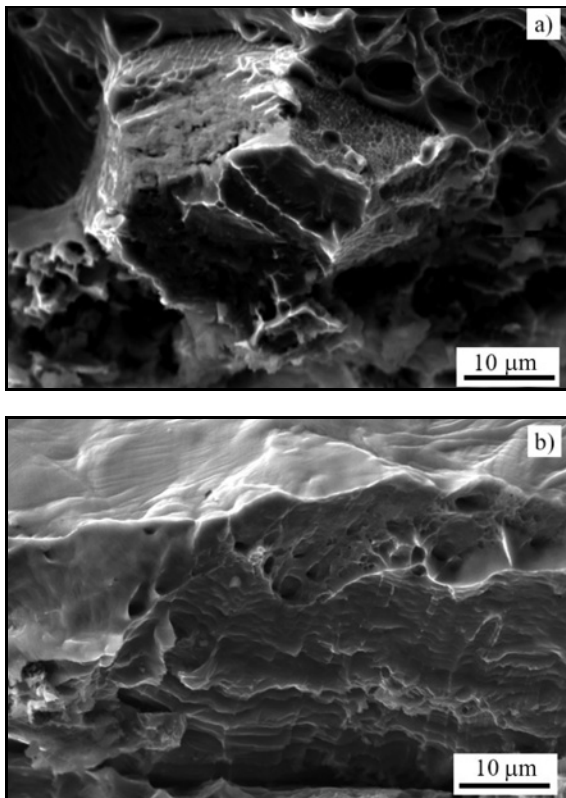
Fracture surfaces with dimples and facets of intercrystalline fracture.
